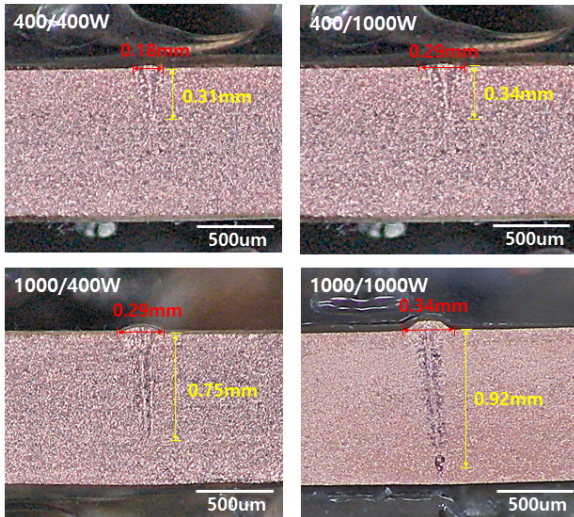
Cross-section of Cu/Cu specimens welded with varying core/ring power
